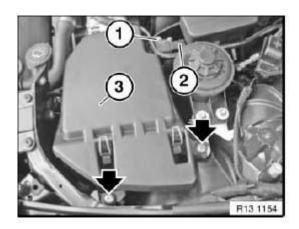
Identifying Plug And Filter Housing (5-Series)
